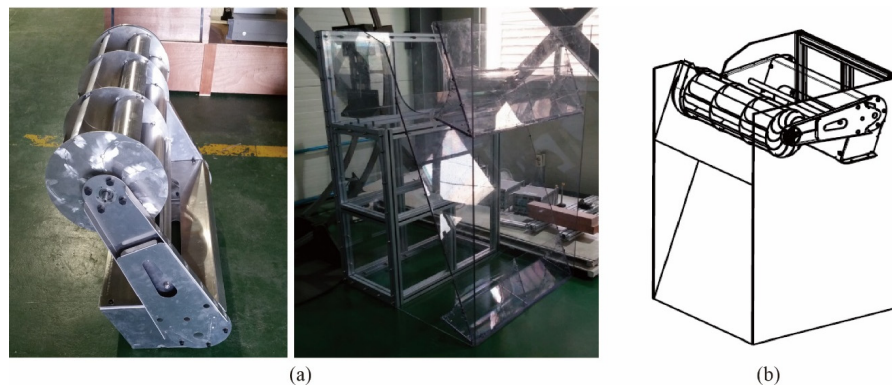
(a) Prototype model of the rotor and the guide vane and (b) assembly diagrams.
